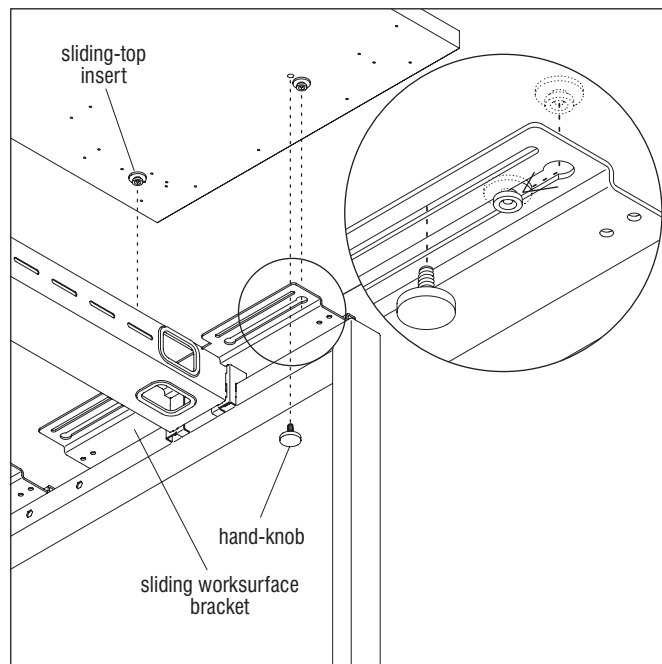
Dual-Sided Benching - Sliding Worksurfaces Installation
